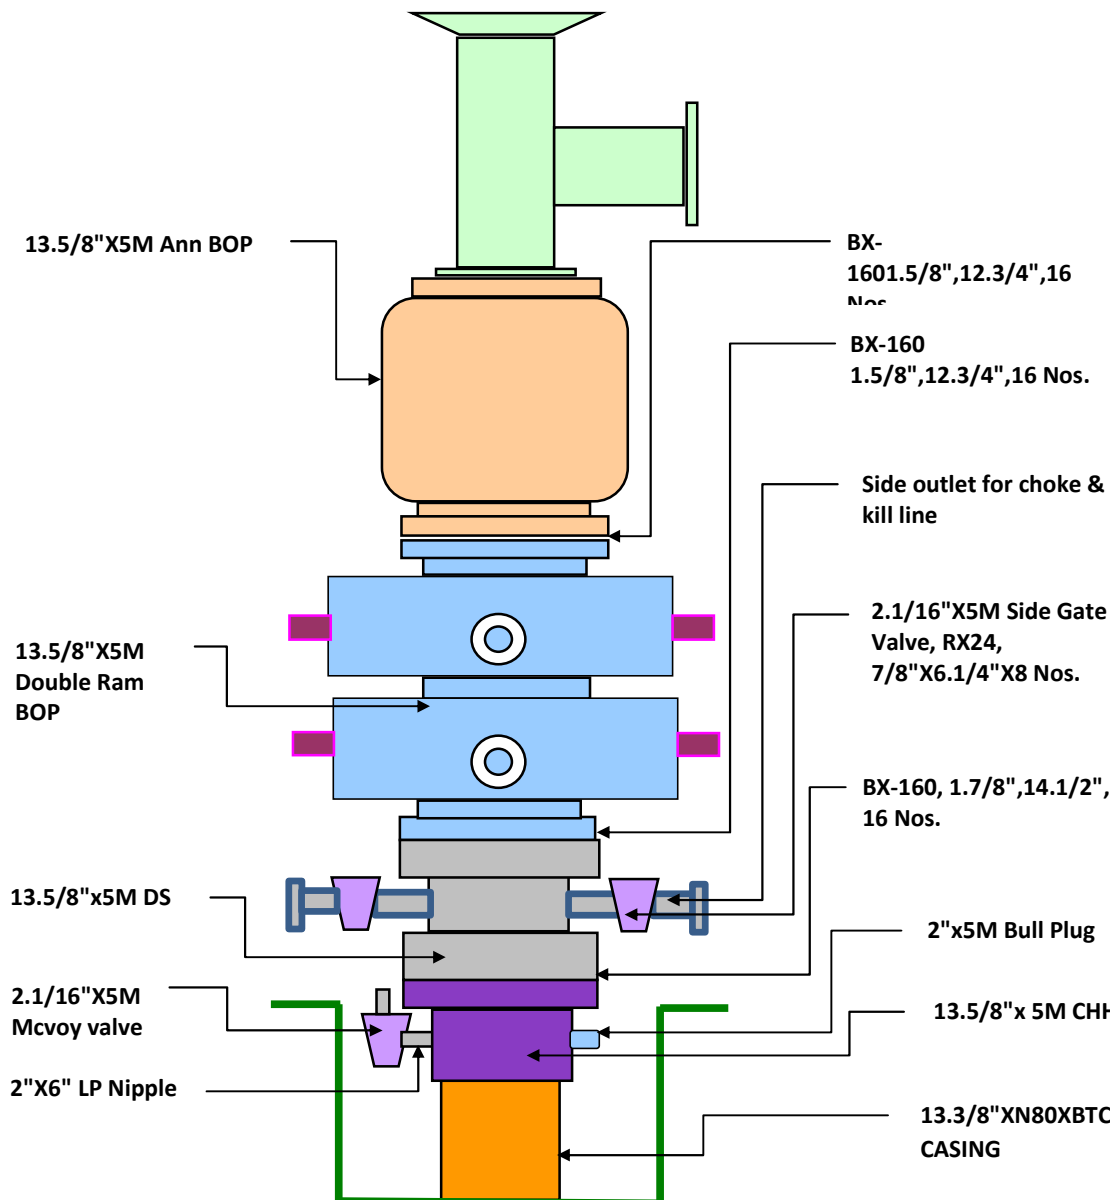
Well Head & BOP Stack for Drilling 12.1/4" Hole
